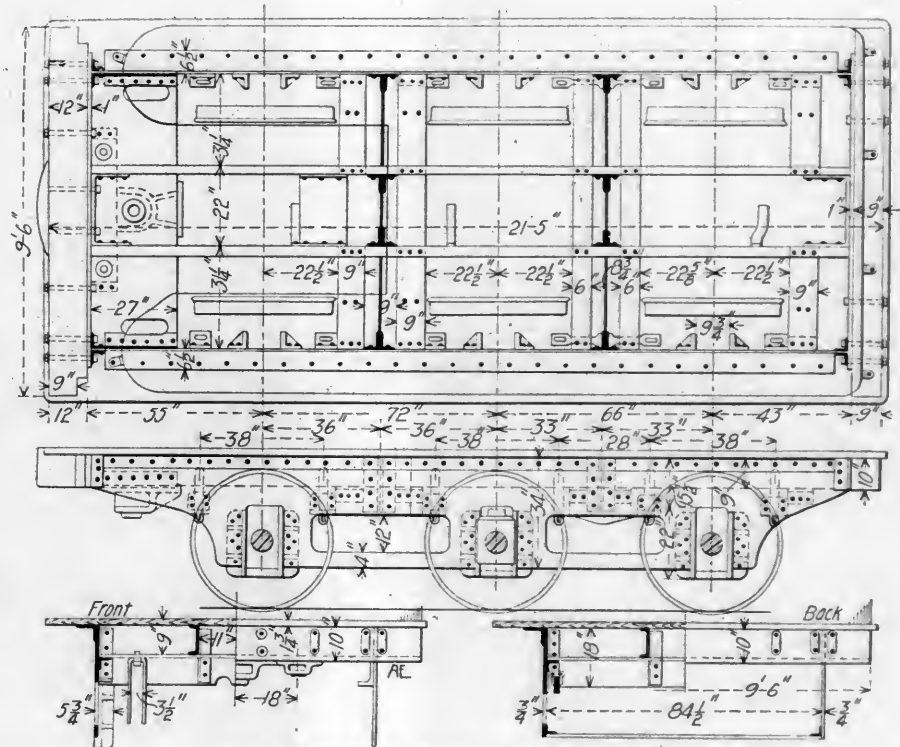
Six-wheel Tender, C. P. &amp; Q. R. R.
